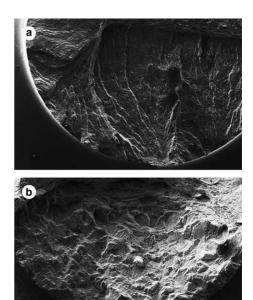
Fracture surfaces of (a) unirradiated and (b) irradiated F82H specimens. The fatigue tests were performed at 298 K with total strain range of 0.4–0.5%.
